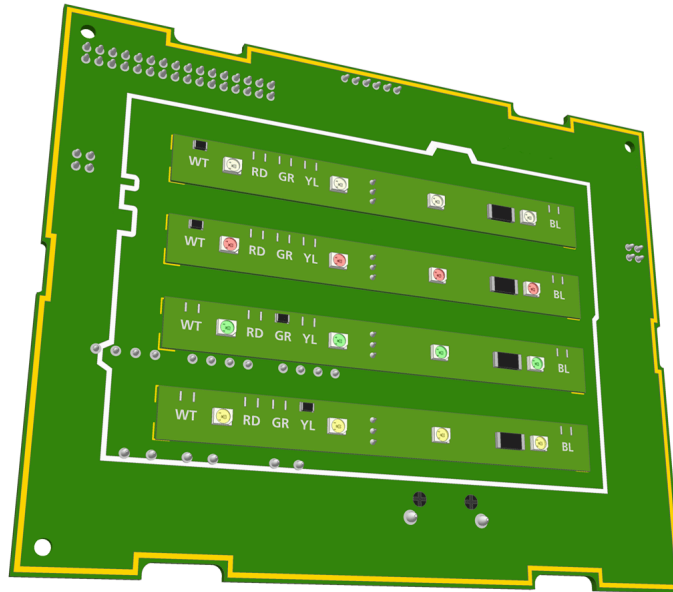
NIRC room controller PCB with 4 LED lamp boards
